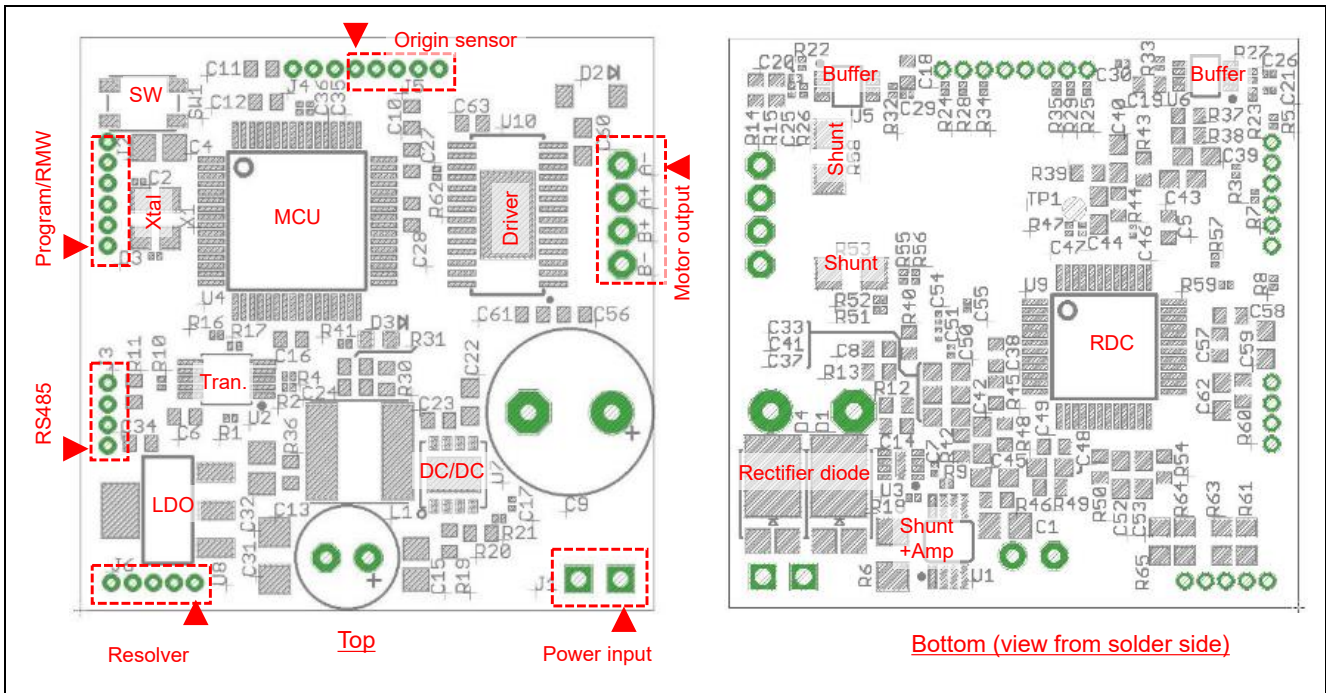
Component Layout Diagram of 42-mm Square Board
